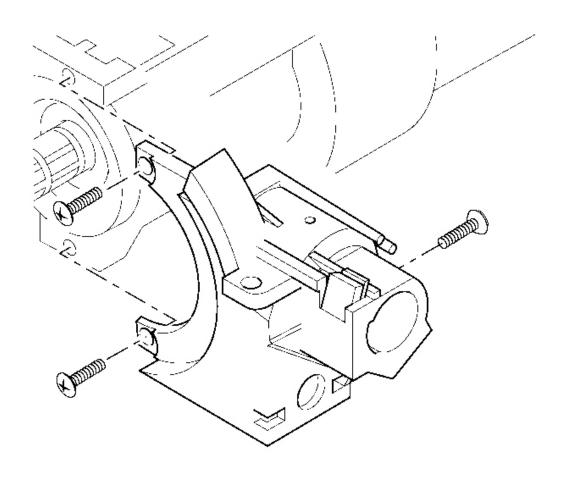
View Of Lock Cylinder Housing TORX Screws Courtesy of GENERAL MOTORS CORP.
